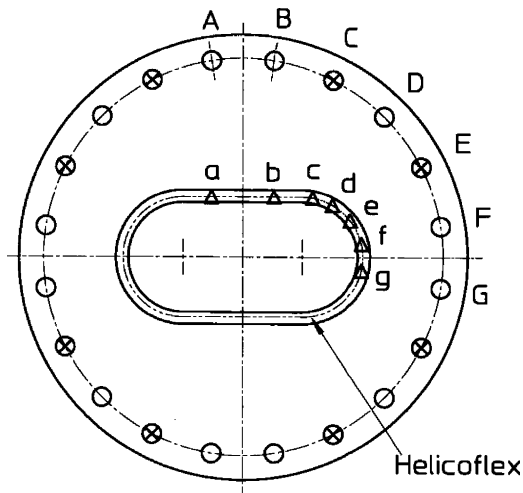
Screw bolt assembly for HER Flange. Screw bolts at C, E and their equivalent position were omitted. The tightening force of screw bolts at F, G and their opposite position is specified to be half of that for other screw bolts. The positions a–g show the nearest point on the Helicoflex from screw position A–G, respectively.
